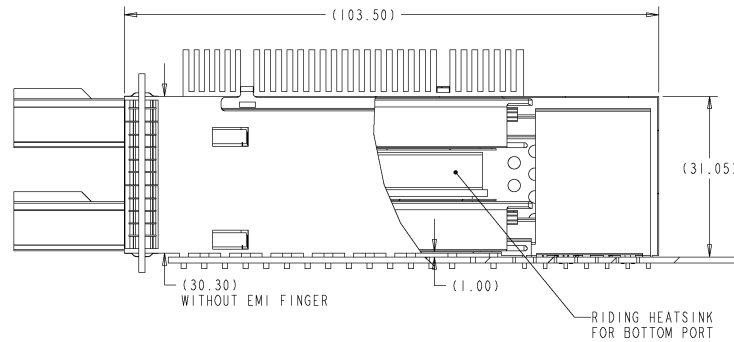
Side partial section view of stacked OSFP-RHS (With host board, connector, cage, module, riding heatsink and panel)
